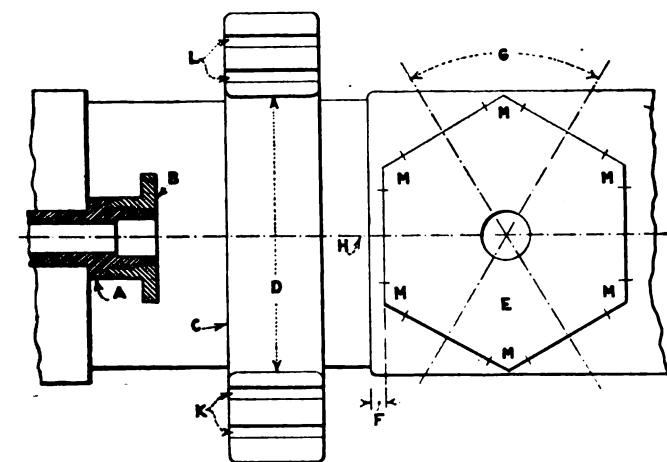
TOOL ENGINEER'S MASTER LAYOUT FOR TURRET LATHE
